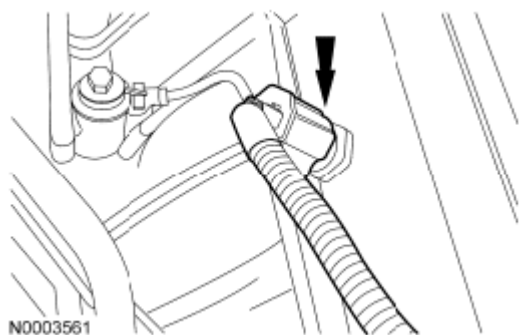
Locating Cylinder Head Temperature (CHT) Sensor Electrical Connector
